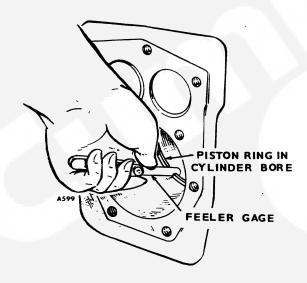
FITTING PISTON RINGS TO CYLINDER
